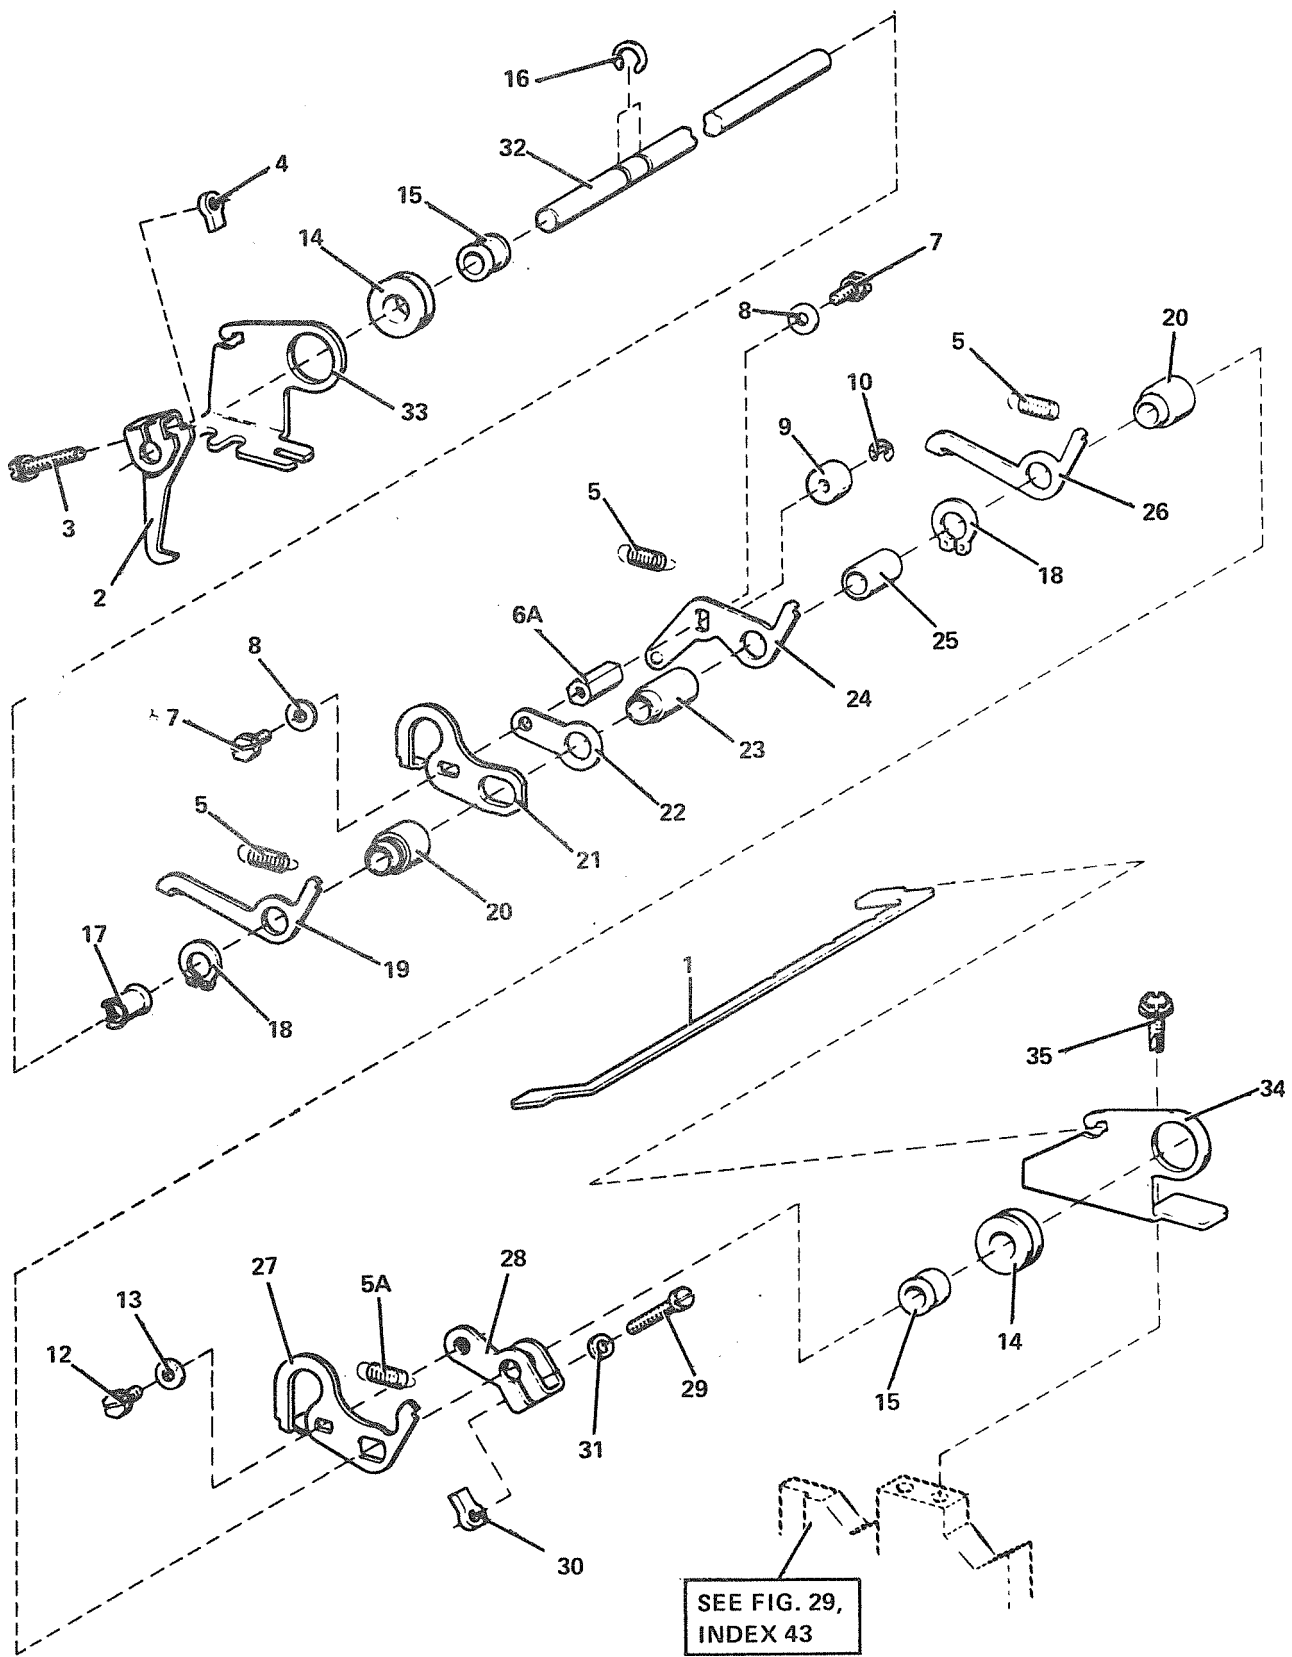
PRINTER-CLUTCH TRIP LEVER MECHANISM. SEE LIST 16.
